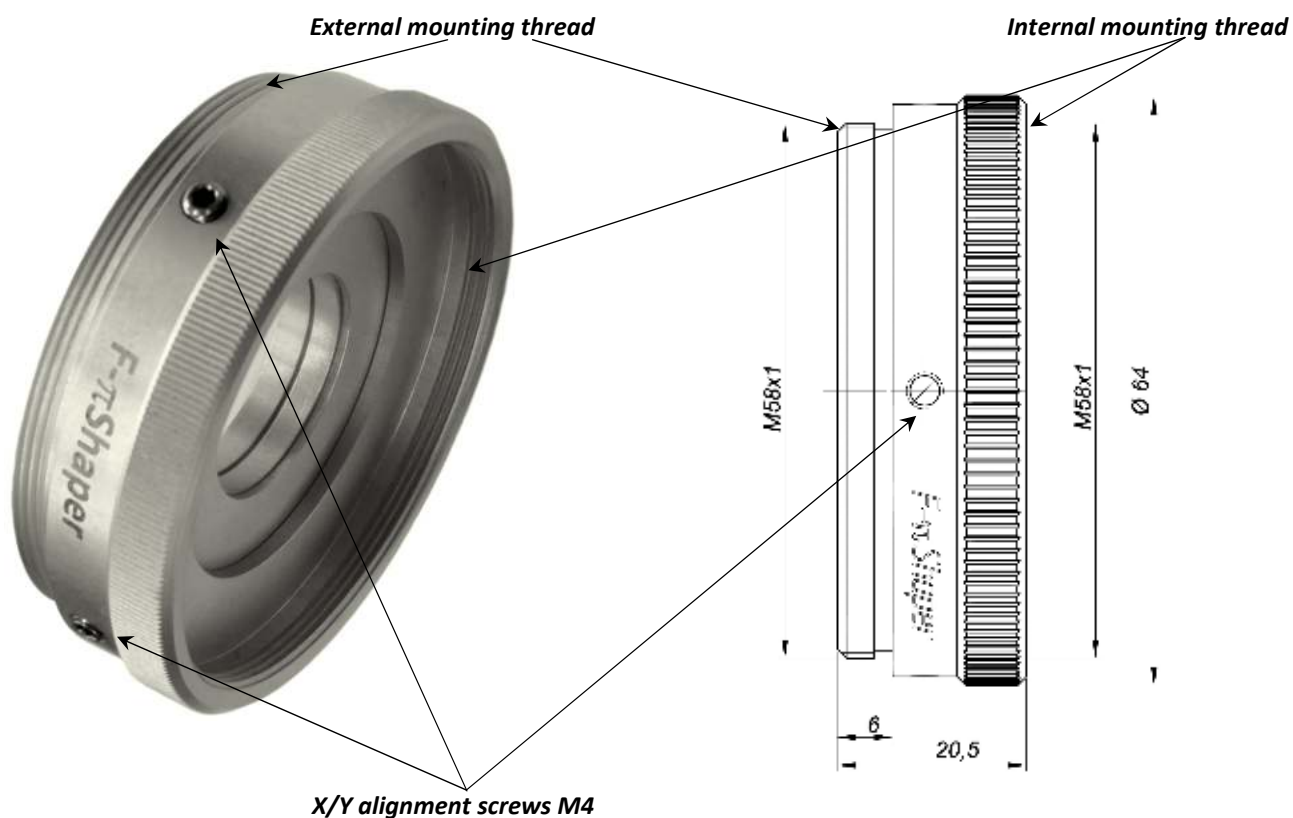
F- $\pi$ Shaper* with CA 38 mm and outer/inner mounting threads M58x1.
